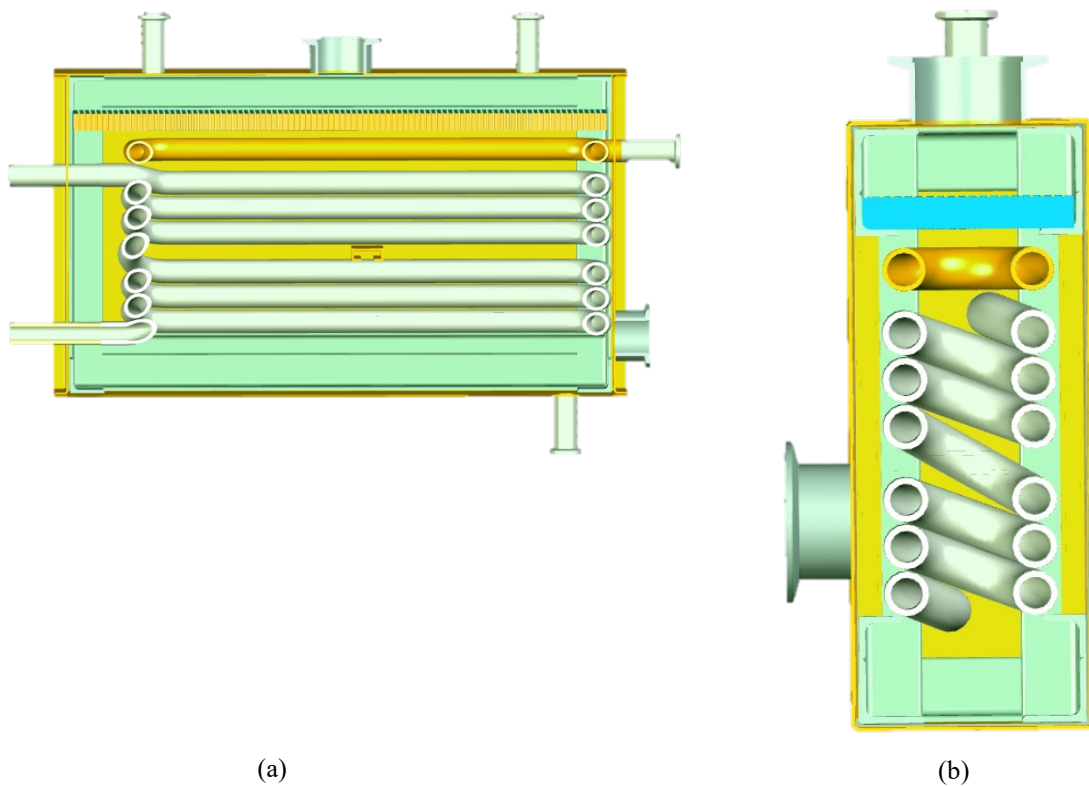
Falling-film evaporator CAD model: front view section (a) and side view section (b).
